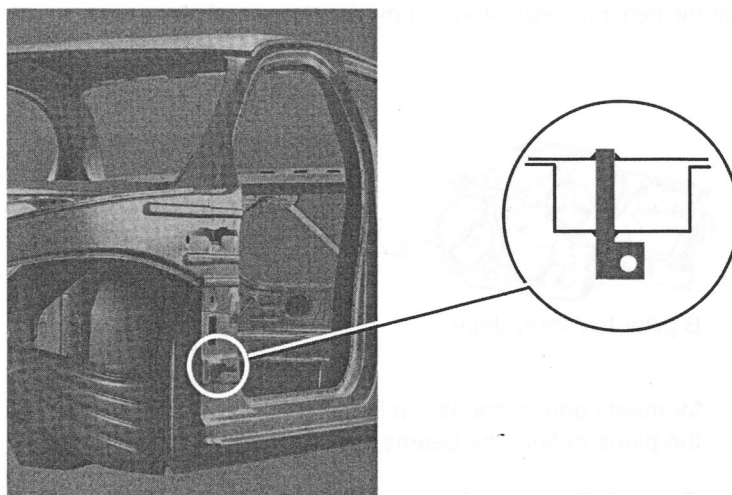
Through-section door hinge attachment. (Courtesy of the American Iron and Steel Institute, UltraLight Steel Auto Body)
